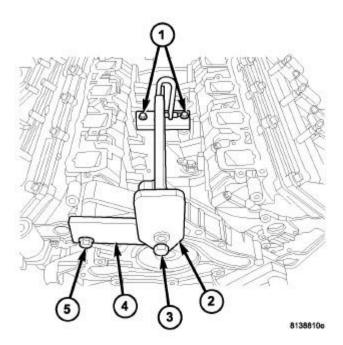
ENGINE LIFT FIXTURE & ADAPTER Courtesy of CHRYSLER LLC
